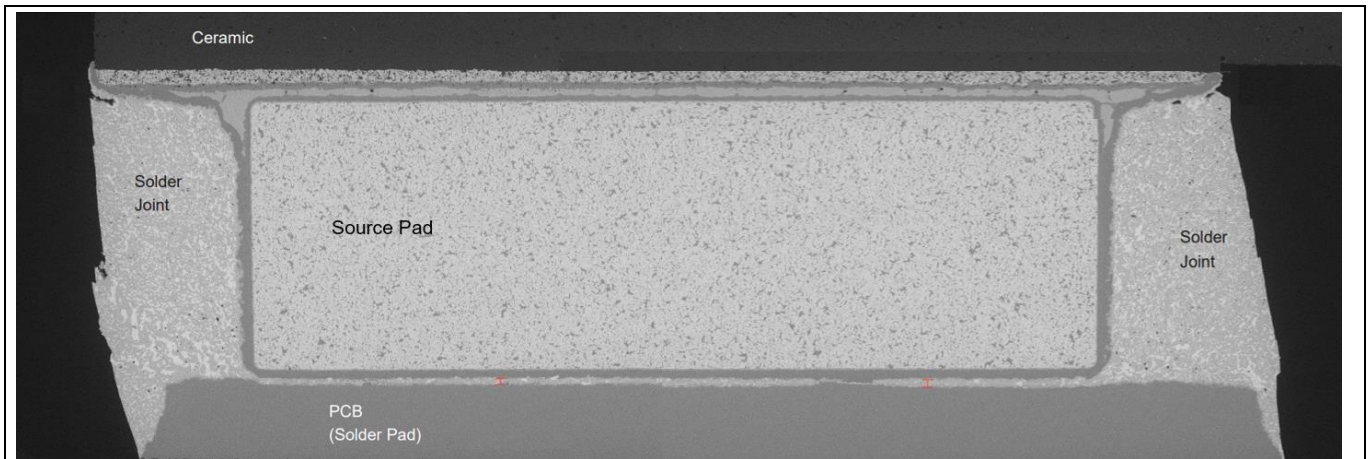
SEM cross section of SMD-0.2e source pad bonded to PCB after 500 temp cycles. Bondline under pad appears to be crack-free
